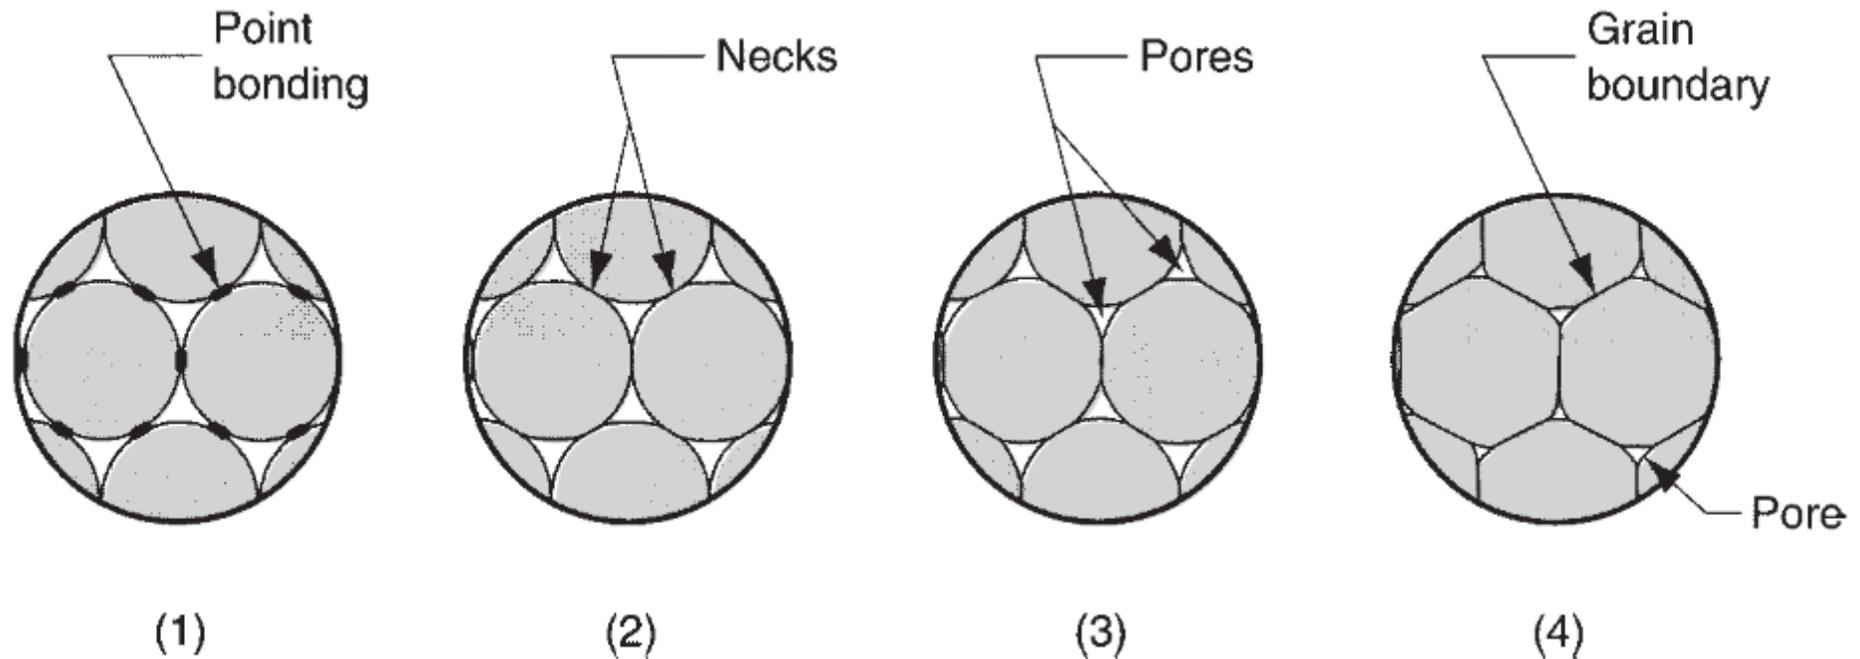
Sintering on a microscopic scale: (1) particle bonding is initiated at contact points; (2) contact points grow into “necks”; (3) the pores between particles are reduced in size; and (4) grain boundaries develop between particles in place of the necked regions.
